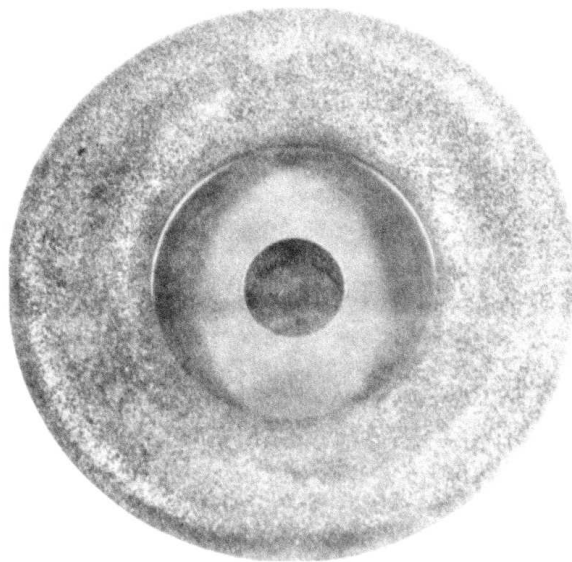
Diamond Plated Rotor Contour Grinding Wheel
